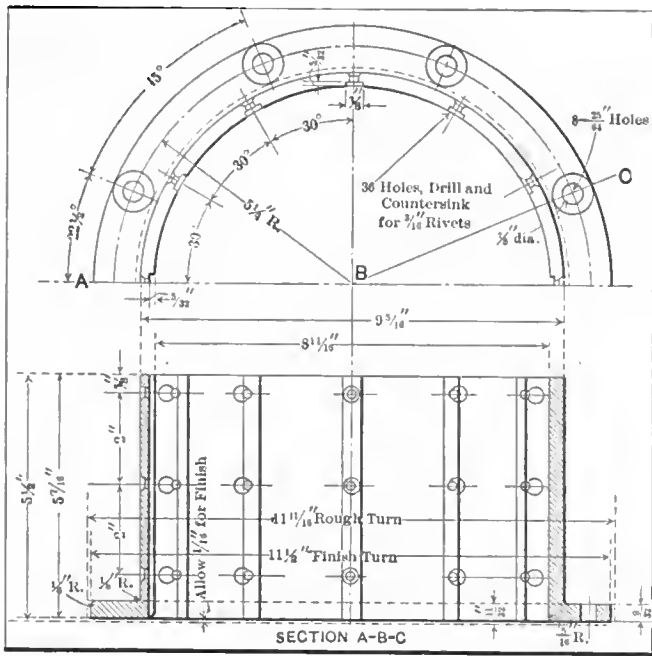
Packard clutch casing of drawn steel housing the 1910 type of dry disc clutch
